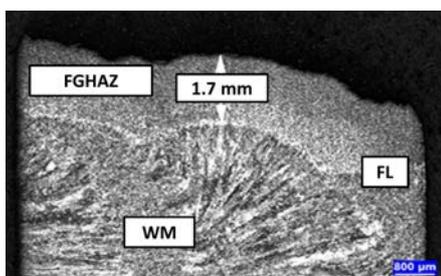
Location of fracture within fine grained heat affected zone of P91 weld creep test sample (600°C/50MPa/55.438h)
